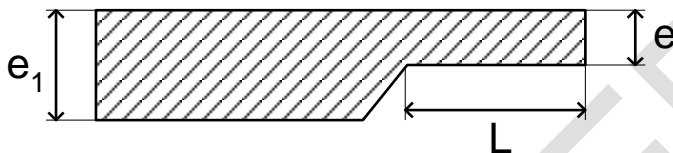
cross section of the pipe wall at the side of the butt weld.
